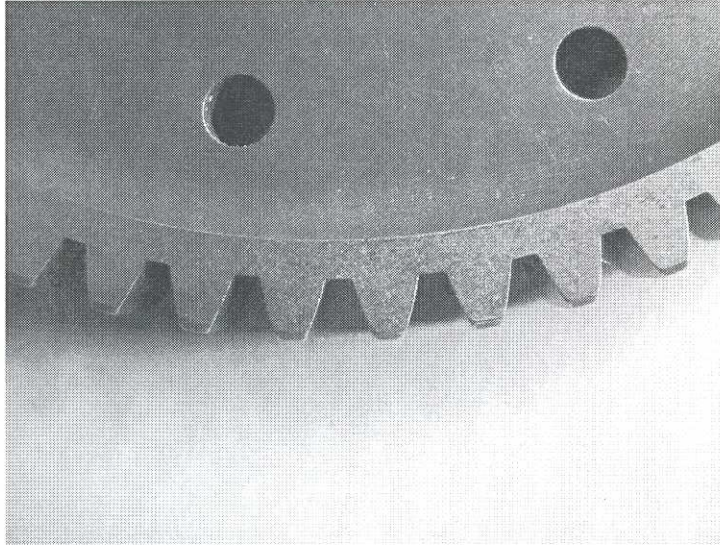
Tooth profile of the cam drive gear, note the smaller root radii.
